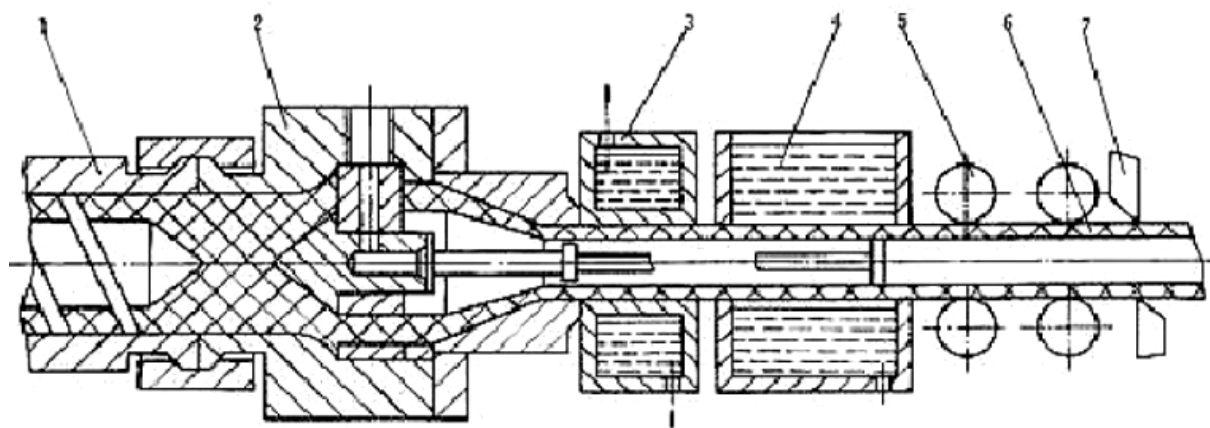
Extrusion molding principle(1-extruder barrel; 2-die head; 3-sizing device; 4-cooling device; 5-pulling device; 6-plastic pipe; 7-cutting device)
